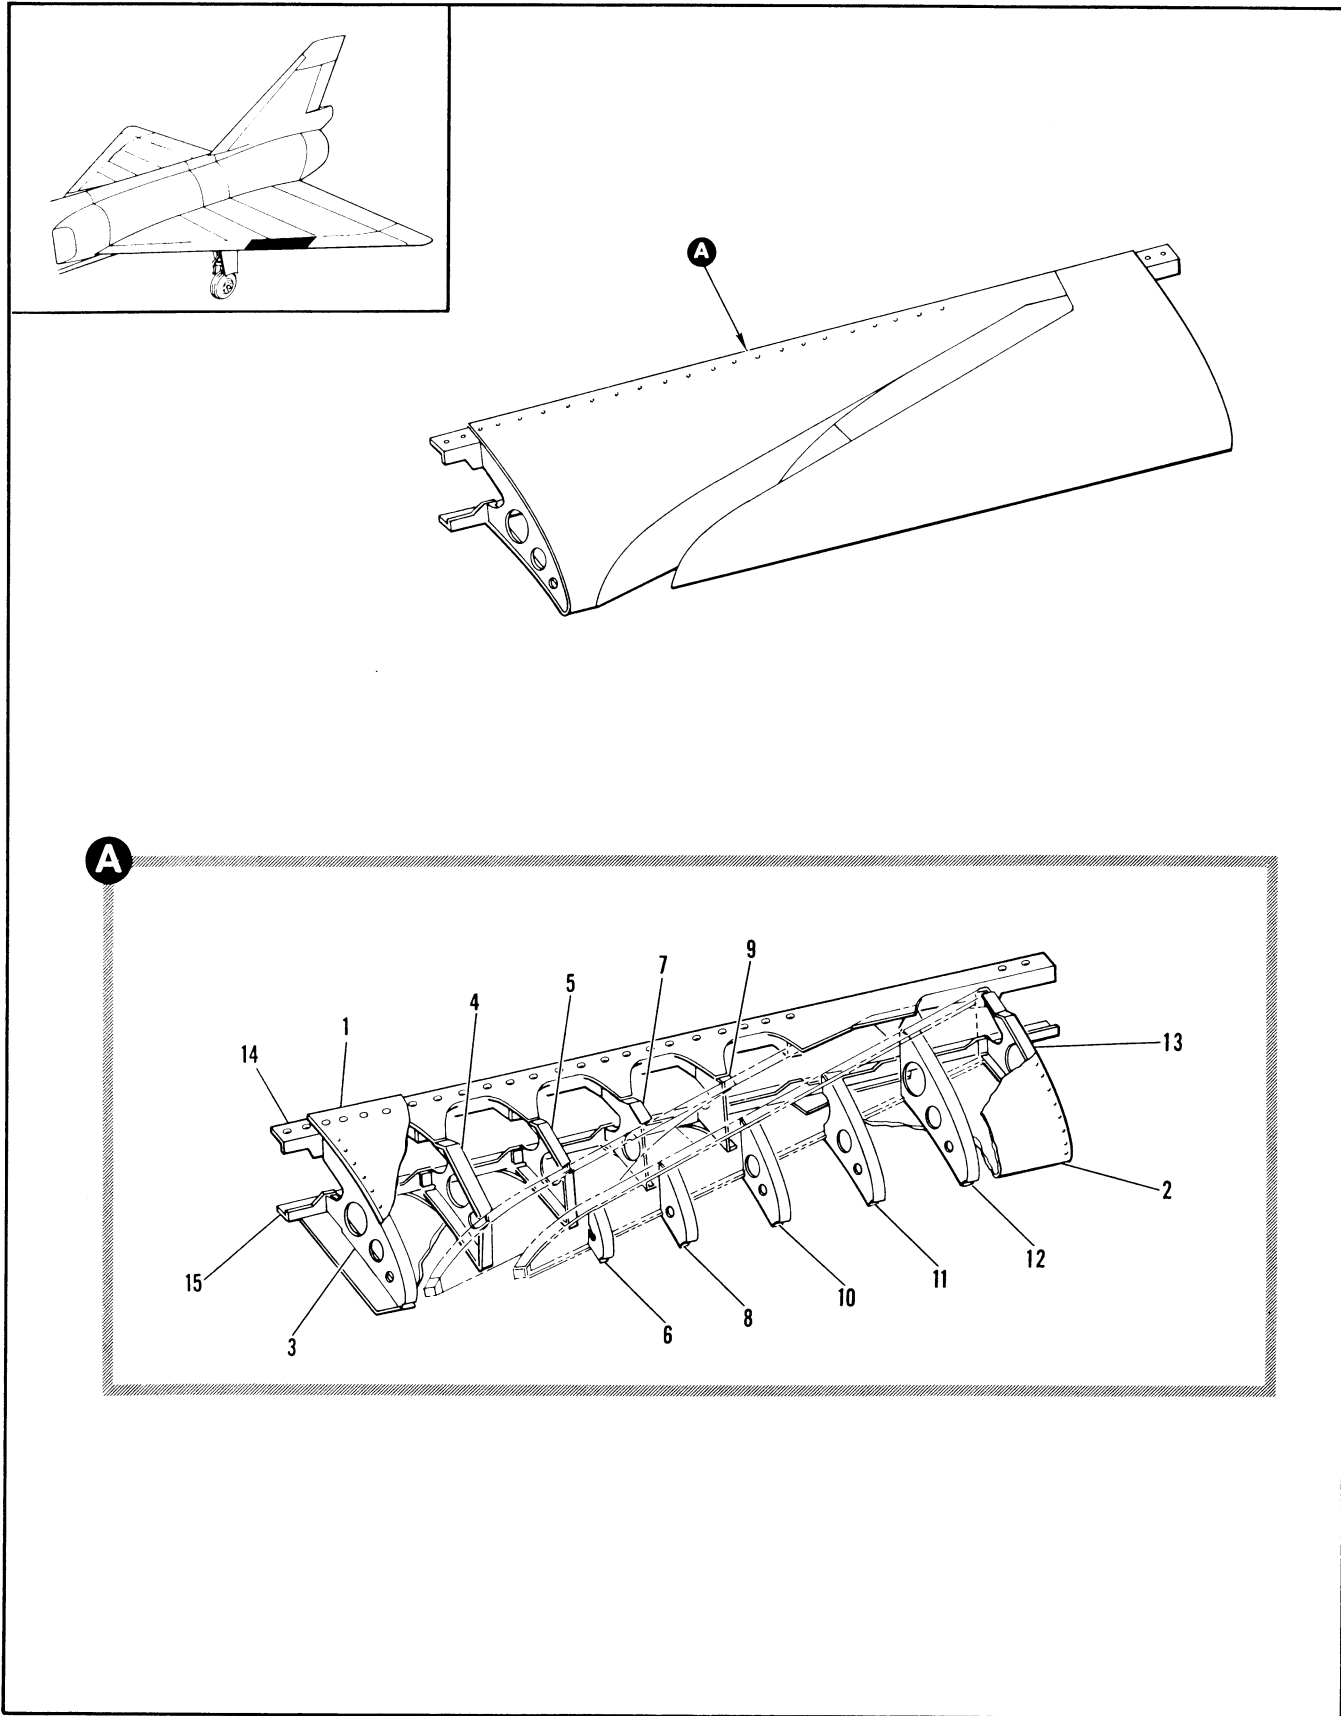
Wing Slotted Leading Edge Assembly Sta 301 to 334
